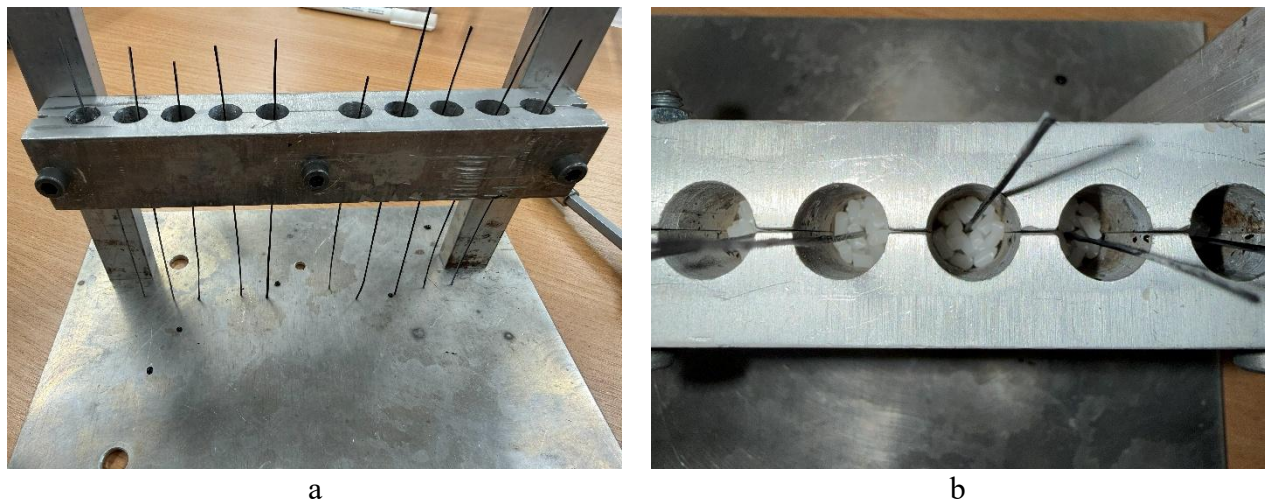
Prepared casting mould for IFSS specimens production: a – side view, b – top view
